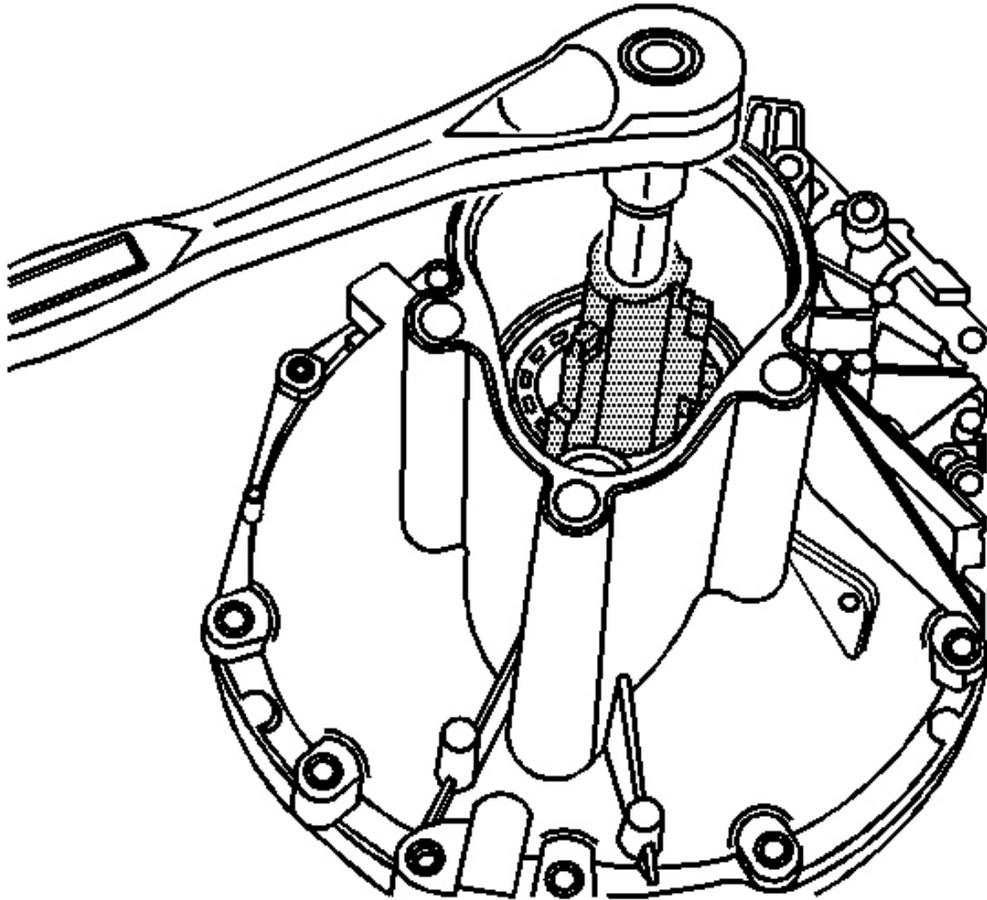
Remove Right Side Differential Side Bearing Cup, Differential Bearing Adjuster Nut & Differential Bearing Adjuster Sleeve
